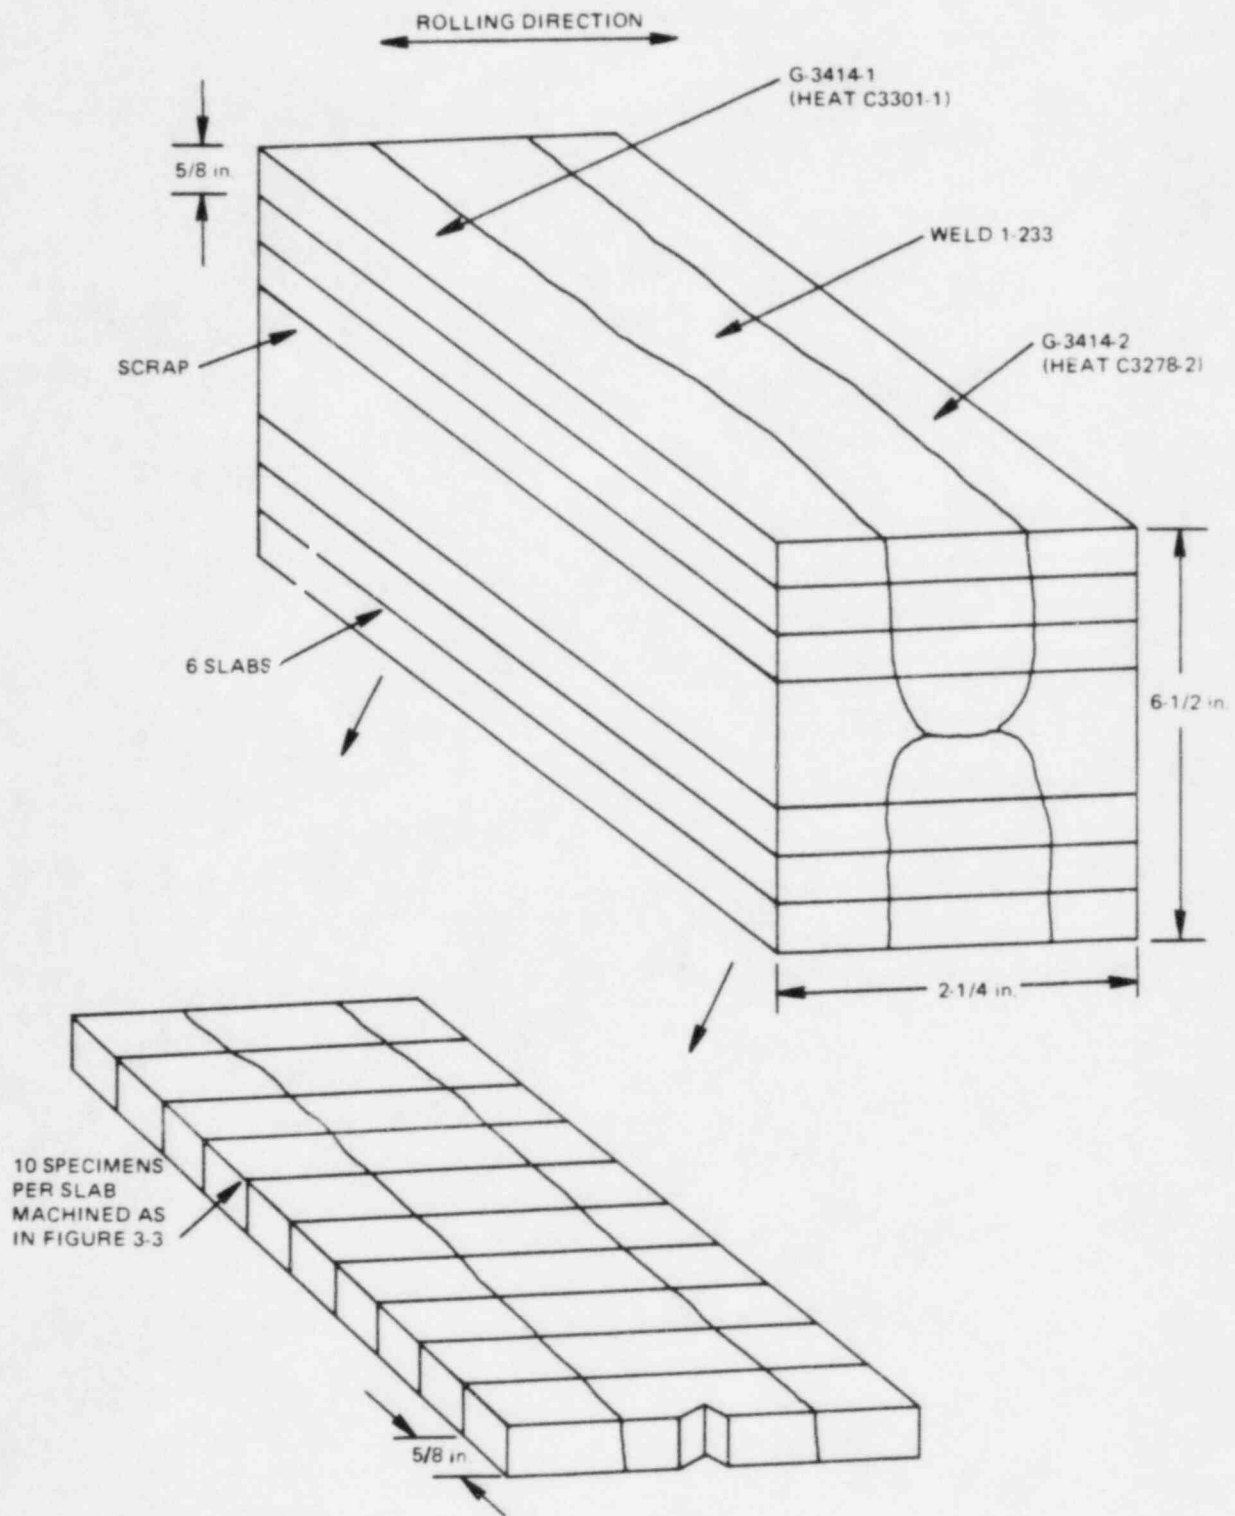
Fabrication Method for Weld Metal Charpy Specimens
